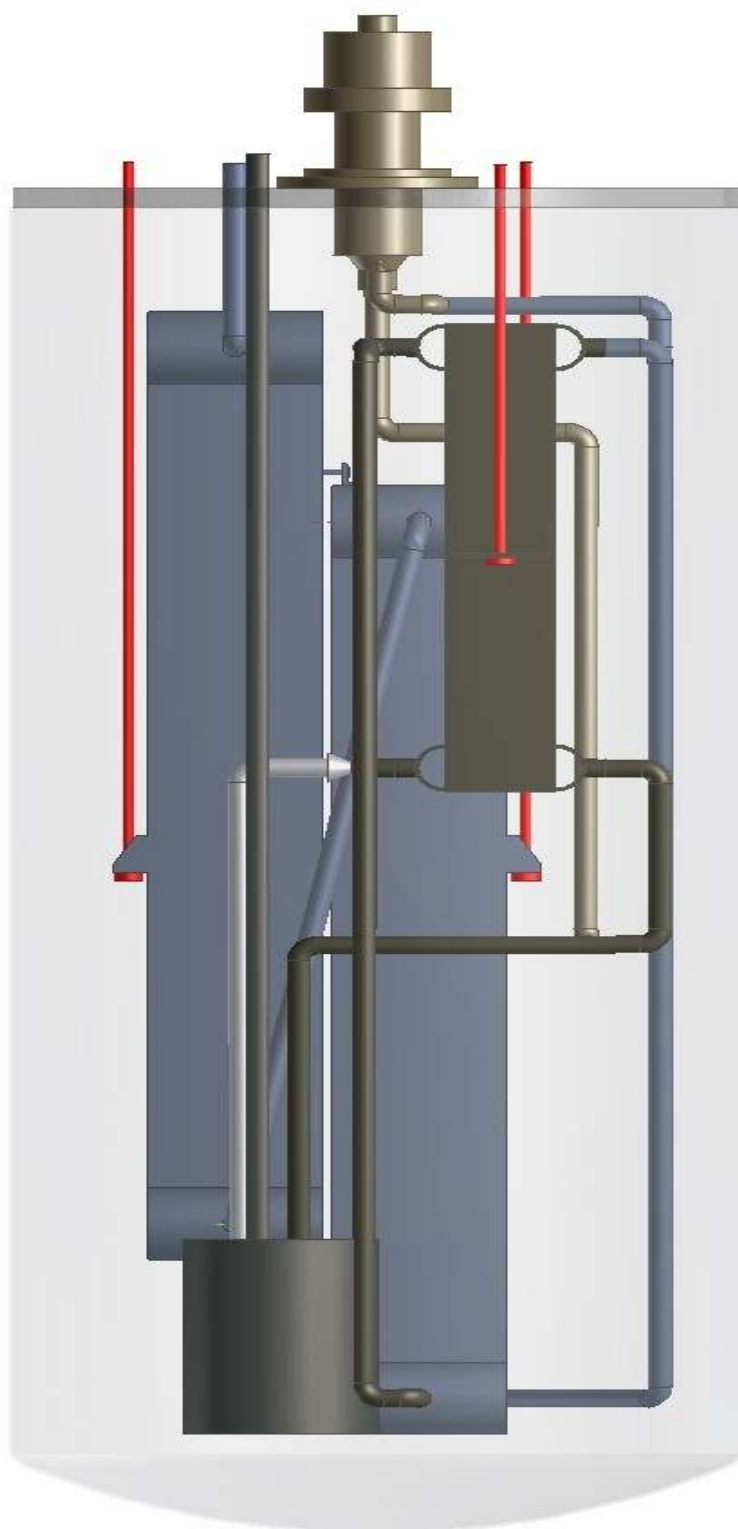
Front View of Nitrogen Liquefier Assembly
